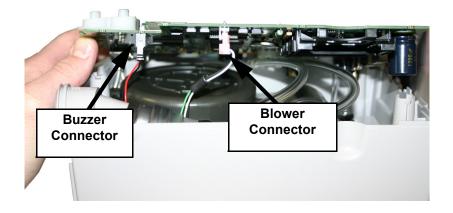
FIGURE F: LOCATION OF BLOWER CABLE CONNECTOR AND BUZZER CONNECTOR
